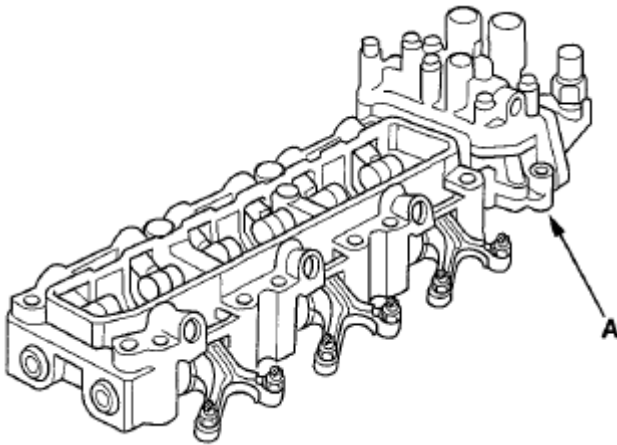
Identifying Rear Rocker Arm Oil Control Valve
